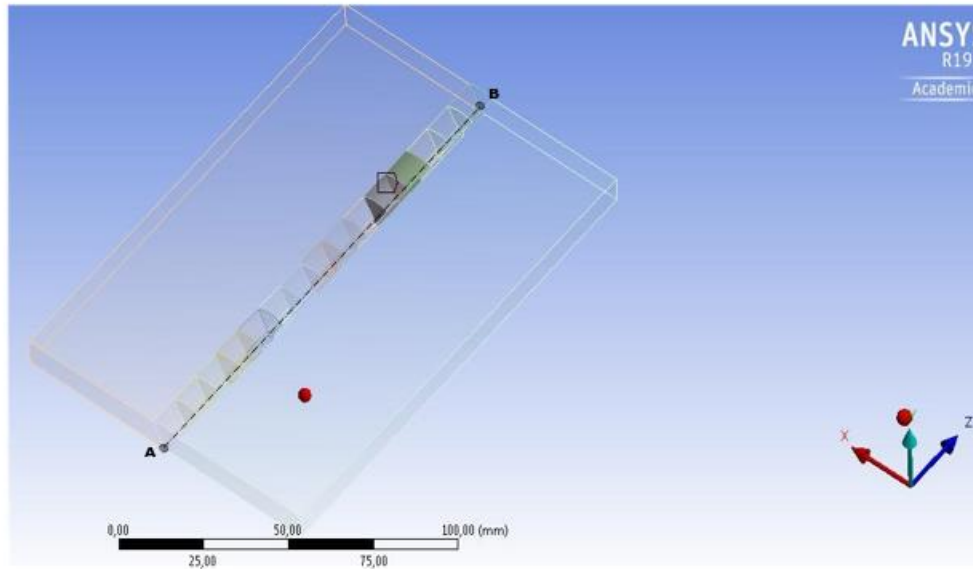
Geometry model showing the weld metal discretisation as a weld joint.
